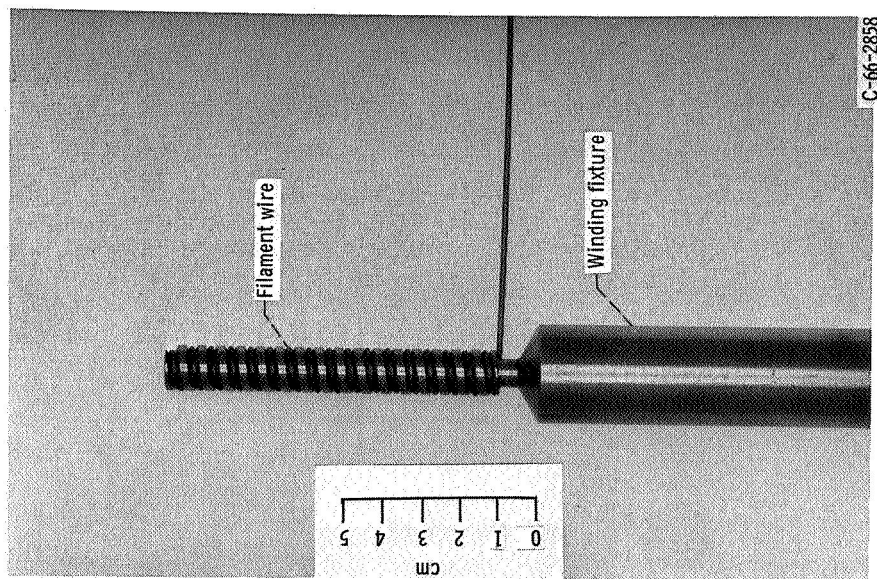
Helical filament winding fixture showing tungsten wire in place.
